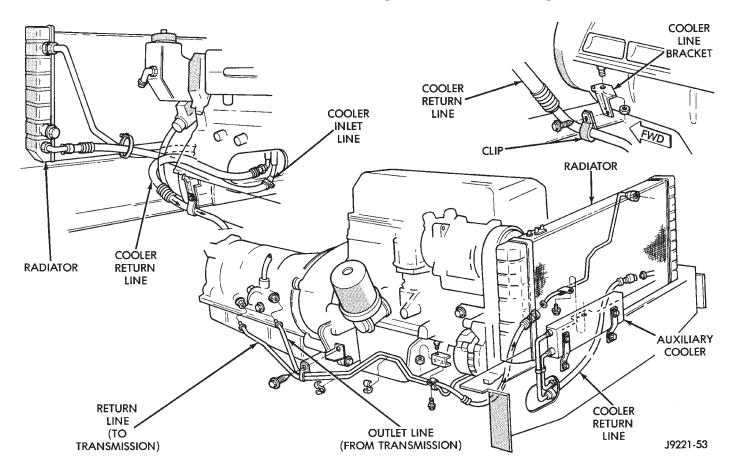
Auxiliary Cooler Mounting (Left Hand Drive)
